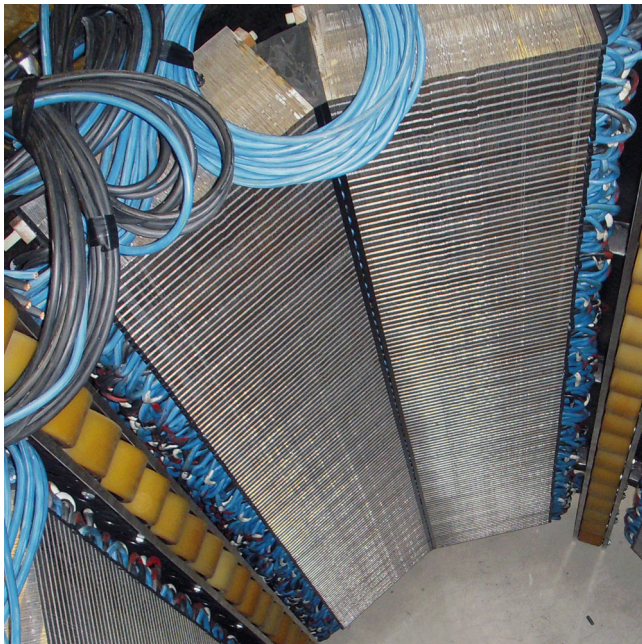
A cable wound UU WEC stator section mounted inside an UU WEC.
